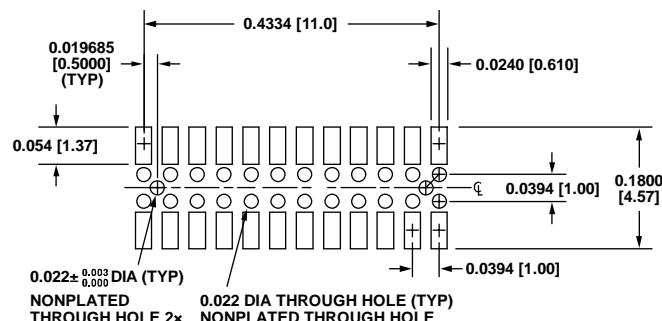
Suggested Layout and Mechanical Design when Using Samtec P/N CLM-112-02-G-D-A for the Mating Connector
